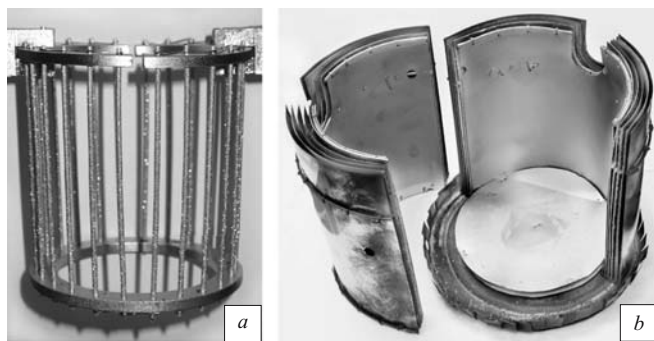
Vacuum furnace heating elements: a) heater; b) heat shield.
